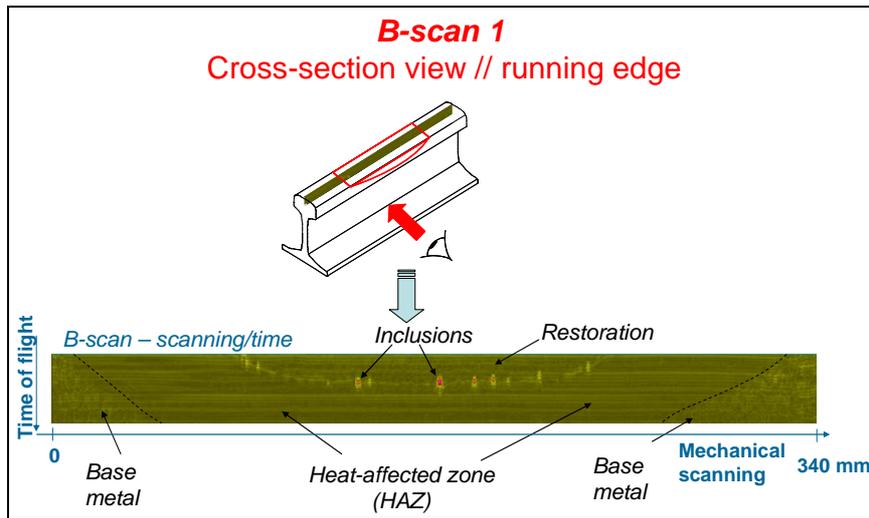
Example of inspection on track – Cross-section view // to the running edge (B-scan)
